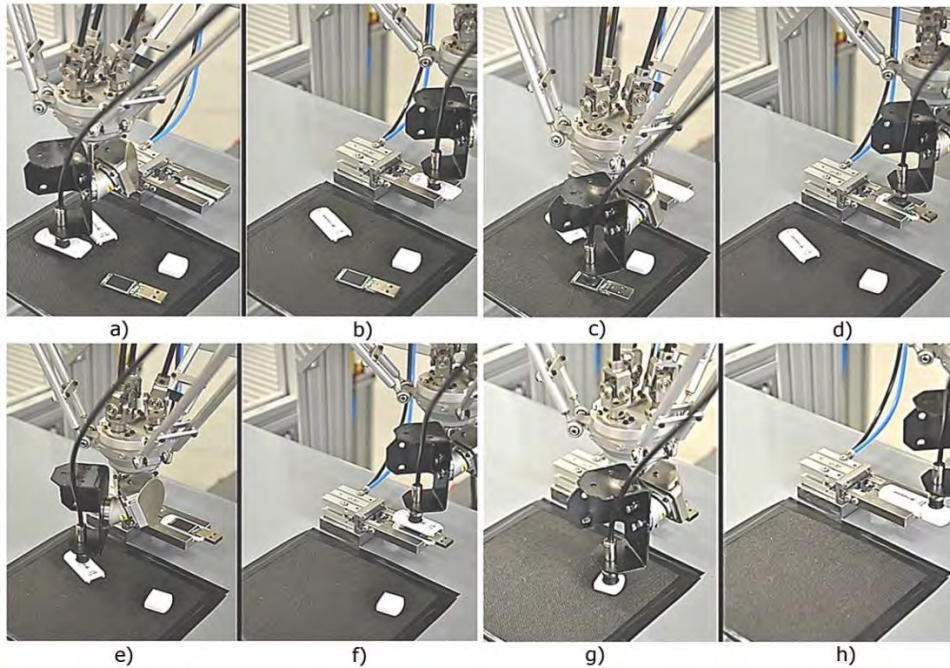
Assembly process of USB memory stick: base part picking (a) and in assembly position (b); electronic board picking (c) and in assembly position (d); upper part picking (e) and in assembly position (f); cup picking (g) and in assembly position (h)
